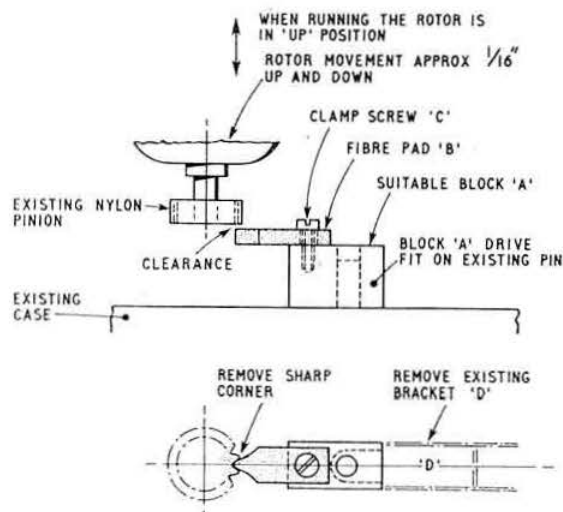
Brake assembly fitted to a CDR AR22 rotator. To set brake: lift rotor to "up" position and set fibre pad "B" just clear of bottom of nylon pinion; drop rotor slowly to ensure fibre tooth lines up with nylon pinion.
